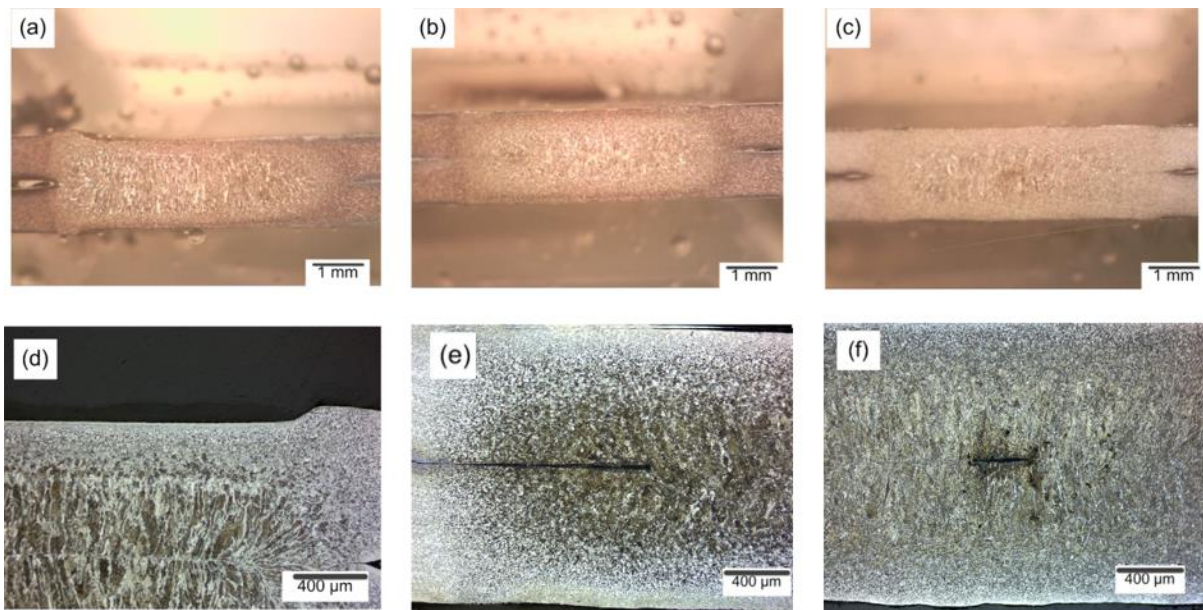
Cross-sectional views of nuggets under stereomicroscope and optical microscope at (a,d) 0 welds, (b,e) 50 welds and (c,f) 150 welds
